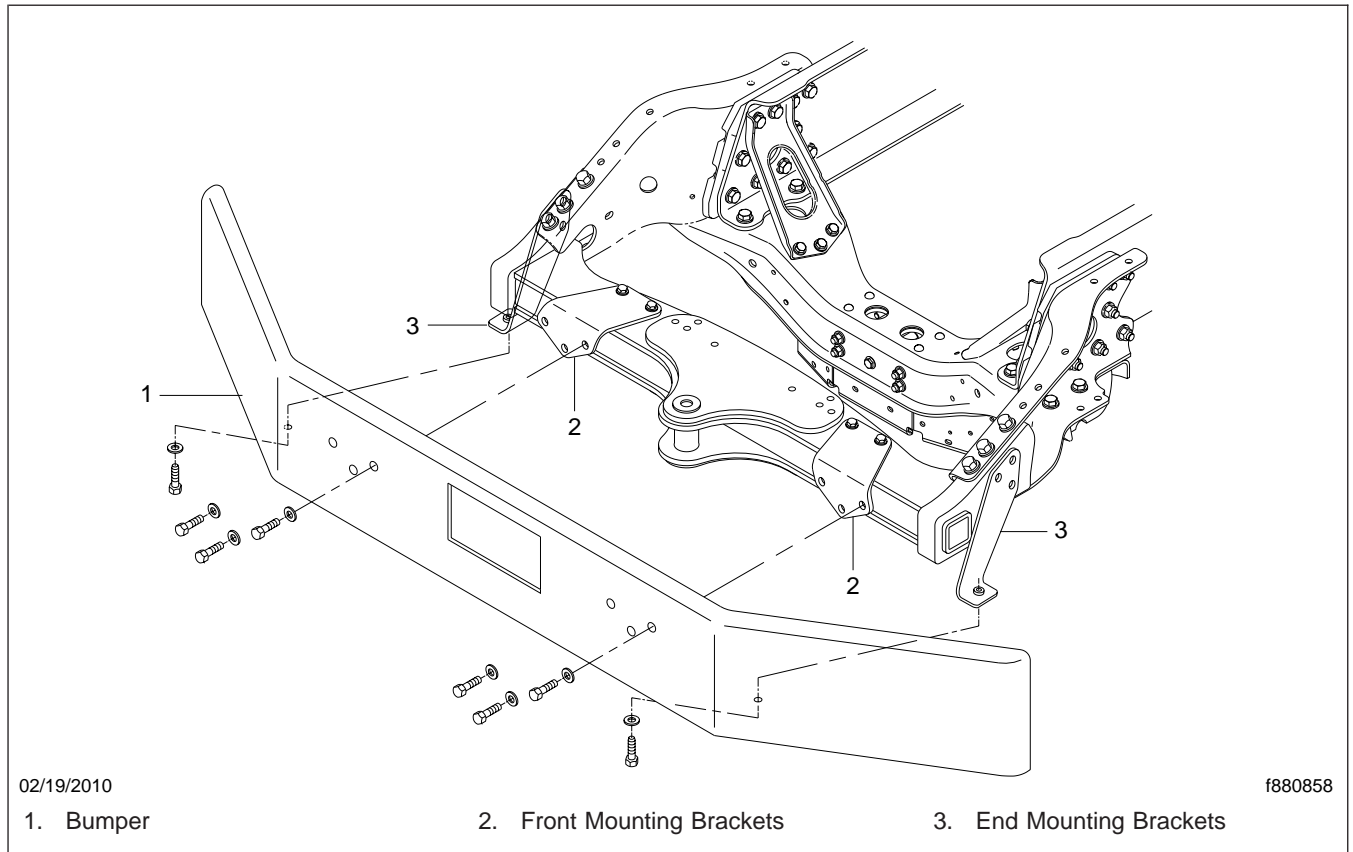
, Bumper, 12-Inch Steel Logger, Severe Service, Set-Back Axle
